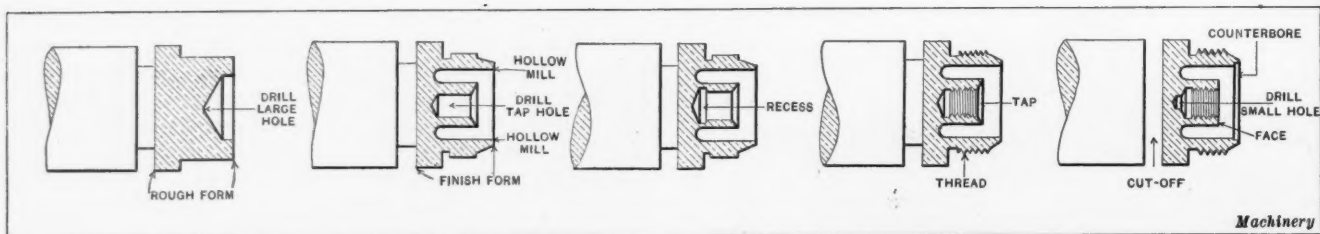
Example of a Job done on New Britain Six-spindle Machine
